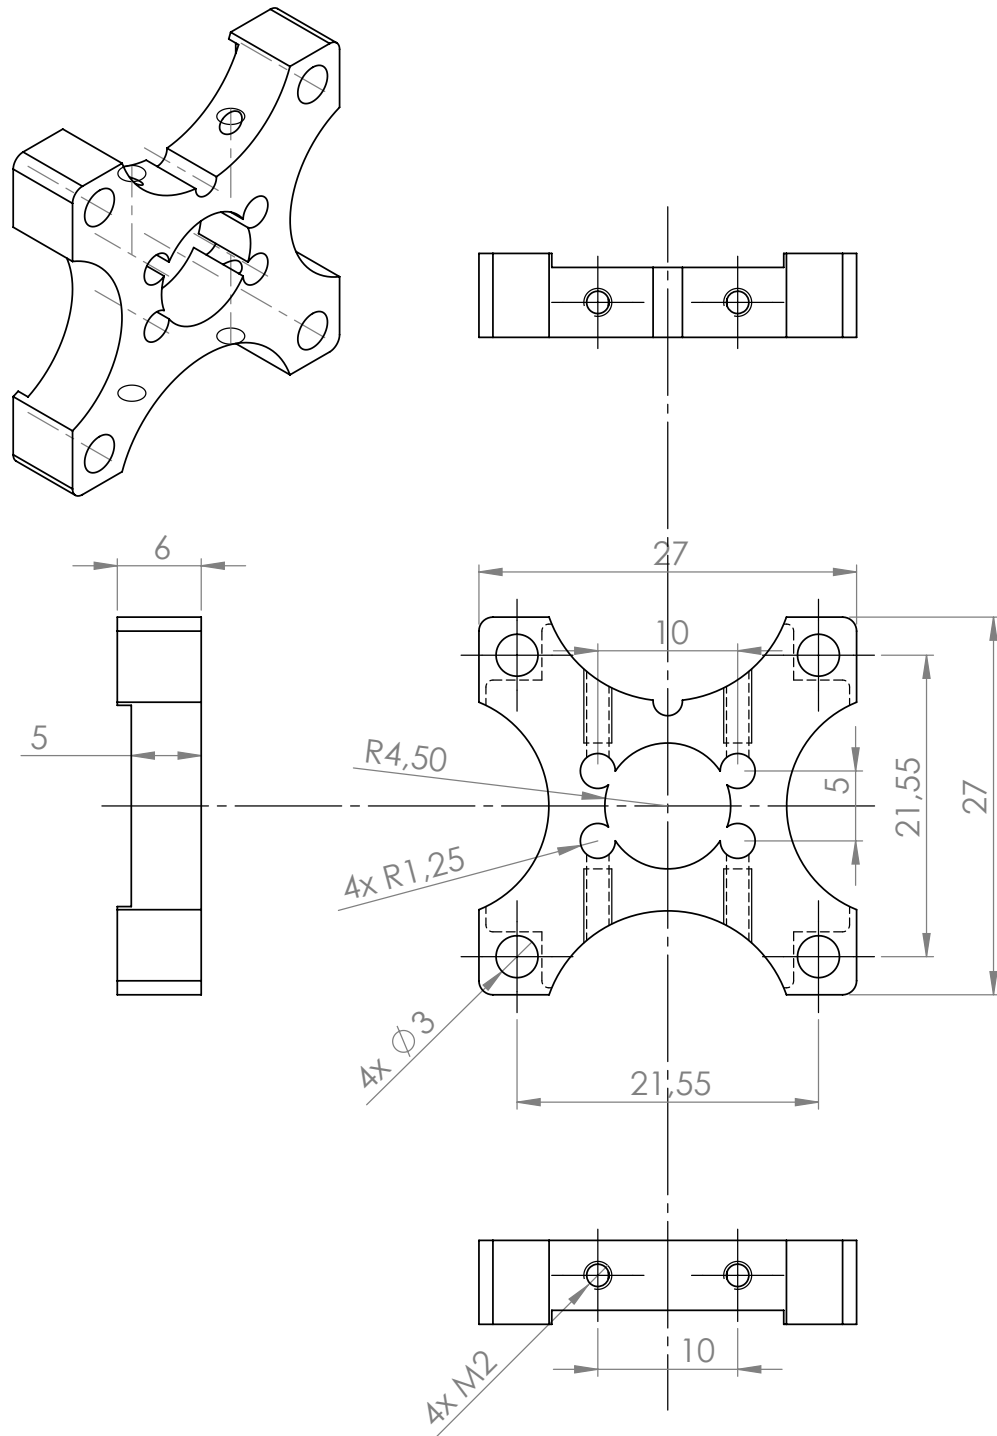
Technical drawing of the electrodes holder in the glass cell science chamber. Dimensions are given in millimeter. Material: Macor®.
